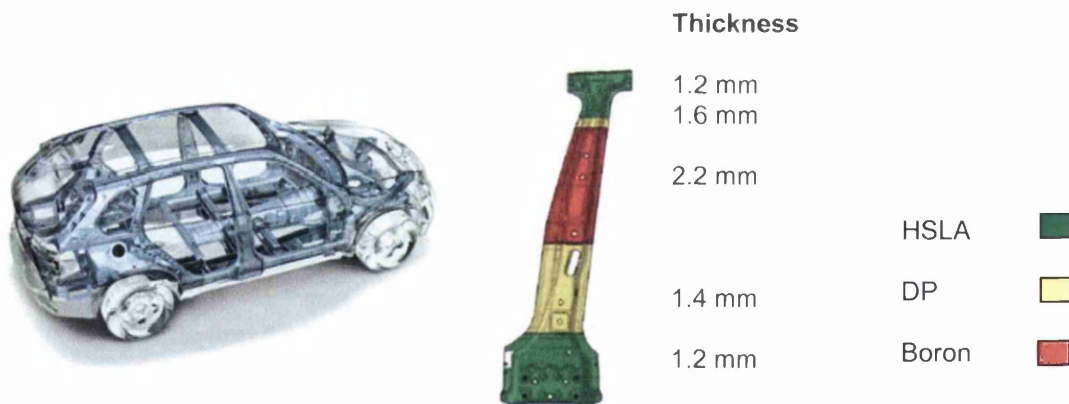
B-pillar from tailor welded blank (adapted from [48])
